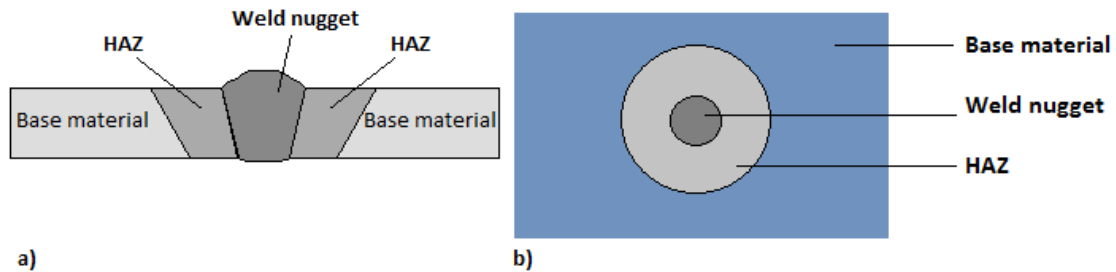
The spot weld and the heat affected zone (HAZ). As observed from side view (a) and top view (b).
